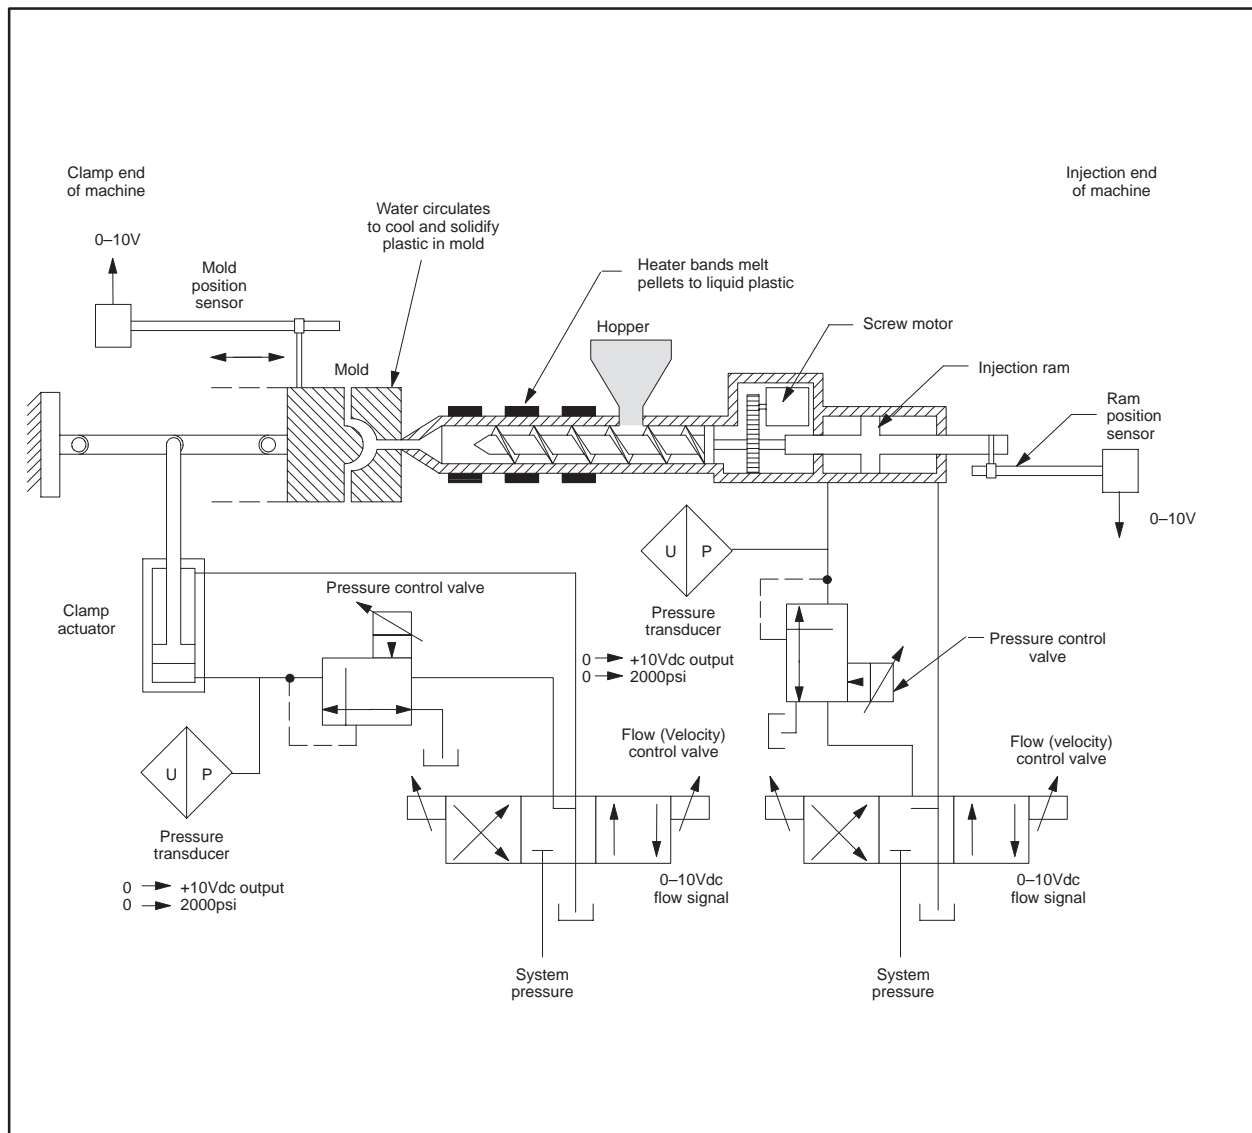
Plastic Injection Molding Machine Control Points, Machine Configuration 1
